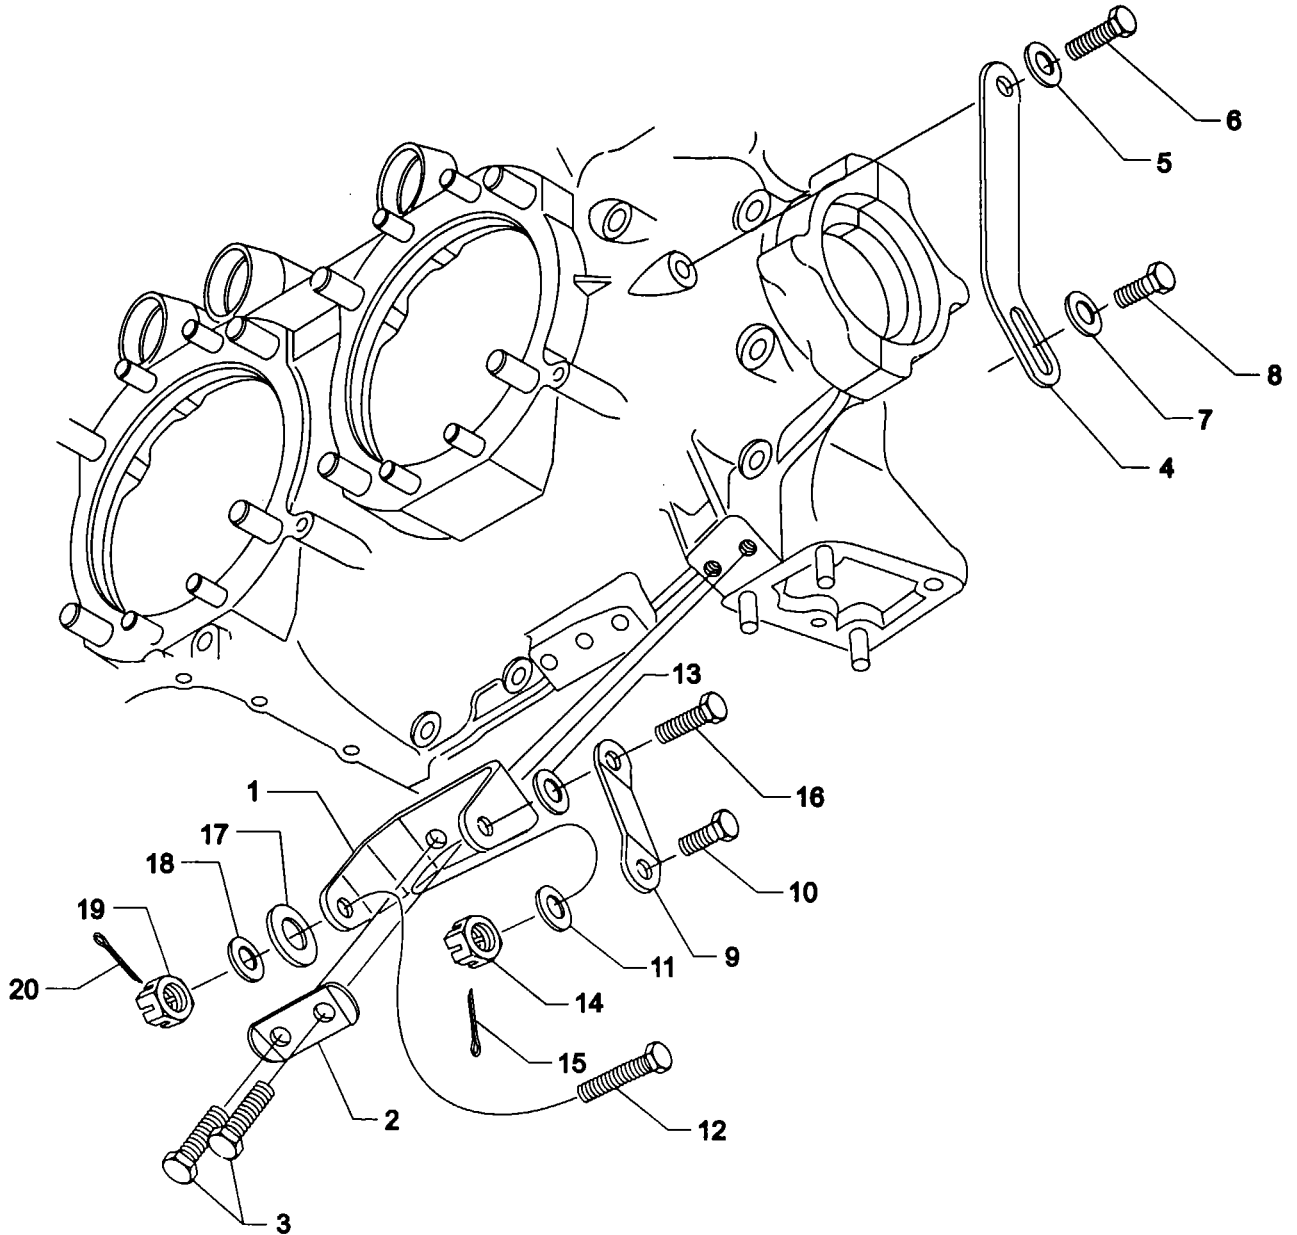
ALTERNATOR MOUNTING AND ATTACHING PARTS
